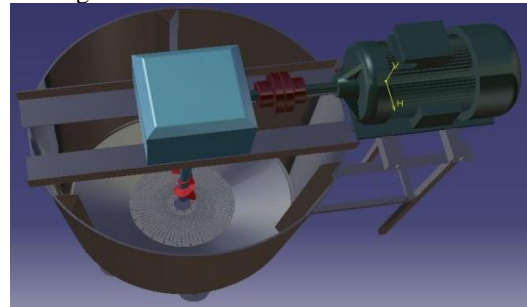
A Bird's Eye View of the Hydrapulper Assembly
